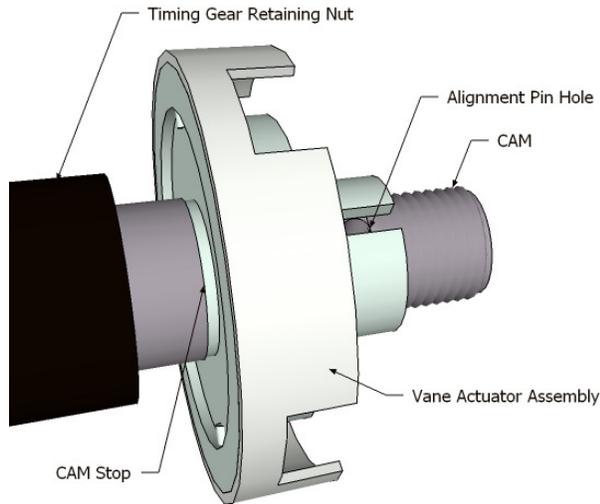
Vane Actuator Assembly Should Rest Against CAM Stop.
